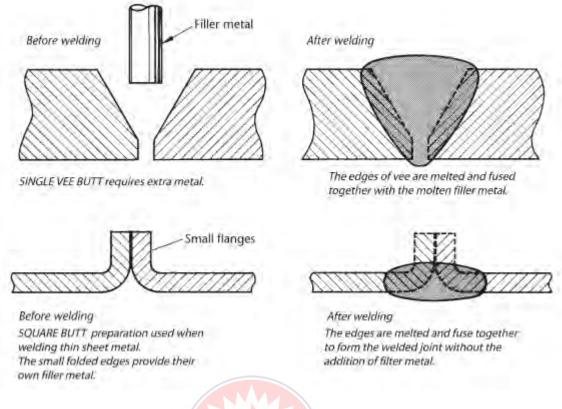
Fusion welding with and without the addition of filler metal
